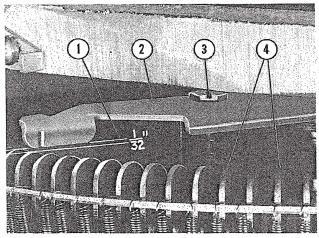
SELECTOR CRANK ARM CLEARANCE ADJUSTMENT
